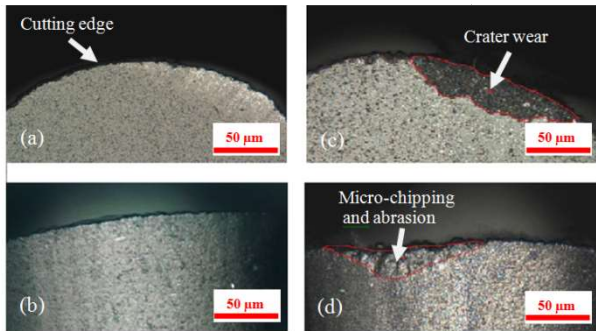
(a) Rake face (c) Flank face of fresh PCD tool (b) Rake face (d) Flank face of PCD tool after 20km of tool travel
